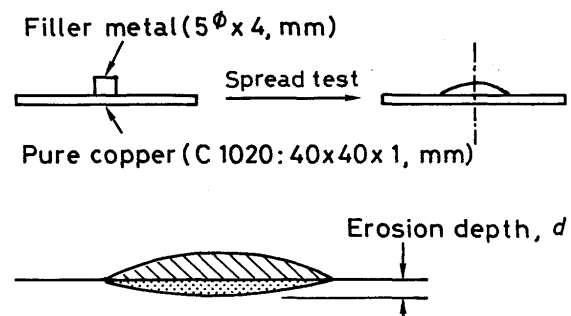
Measurement of erosion depth at center of spread test specimen.
